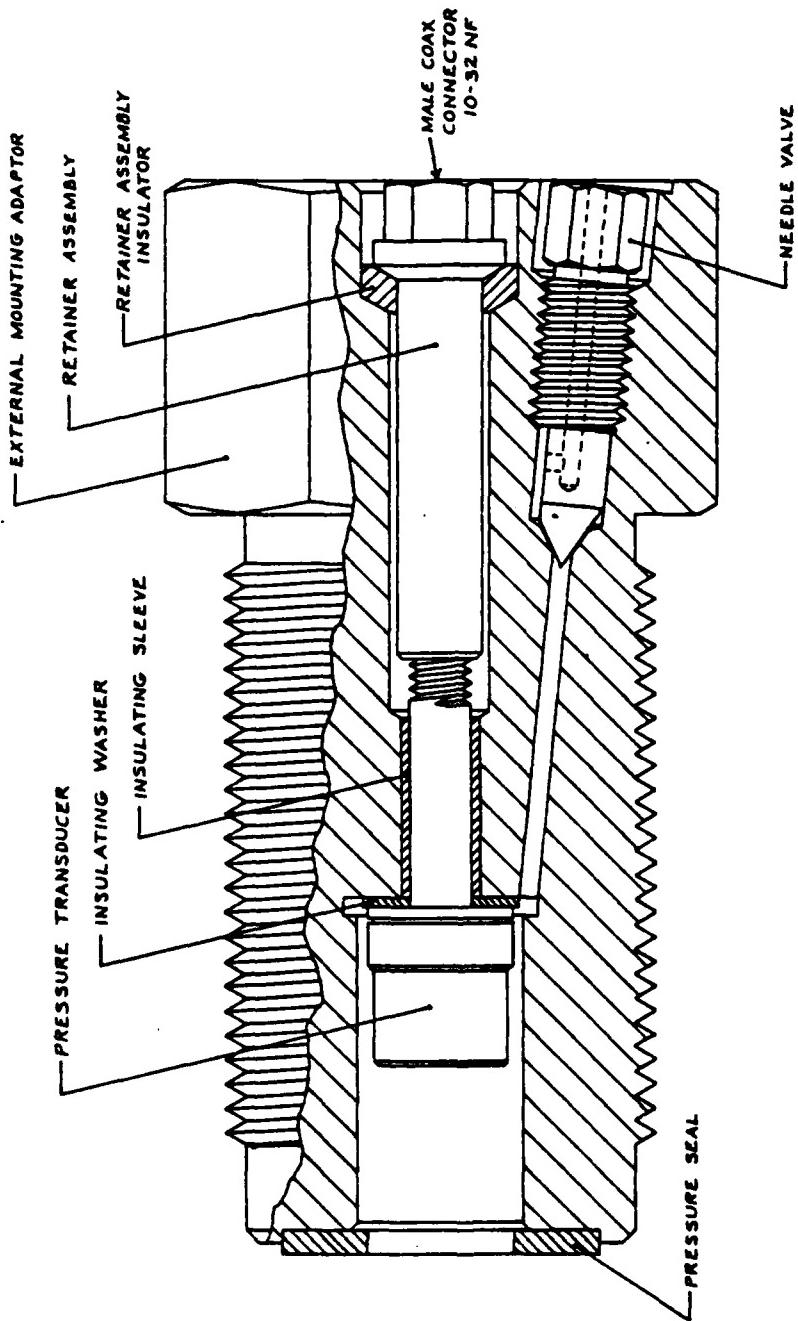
Assembly drawing of model E15M pressure transducer.
